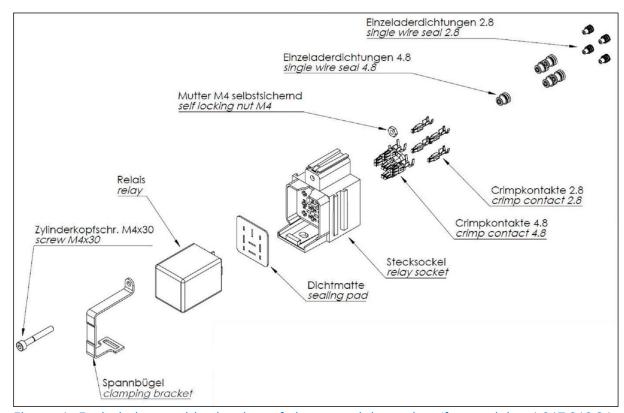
Exploded assembly drawing of the watertight socket (for modules 1.017.010.24, 1.017.010.25, 1.017.010.30, 1.017.010.40, and 1.017.010.50).
